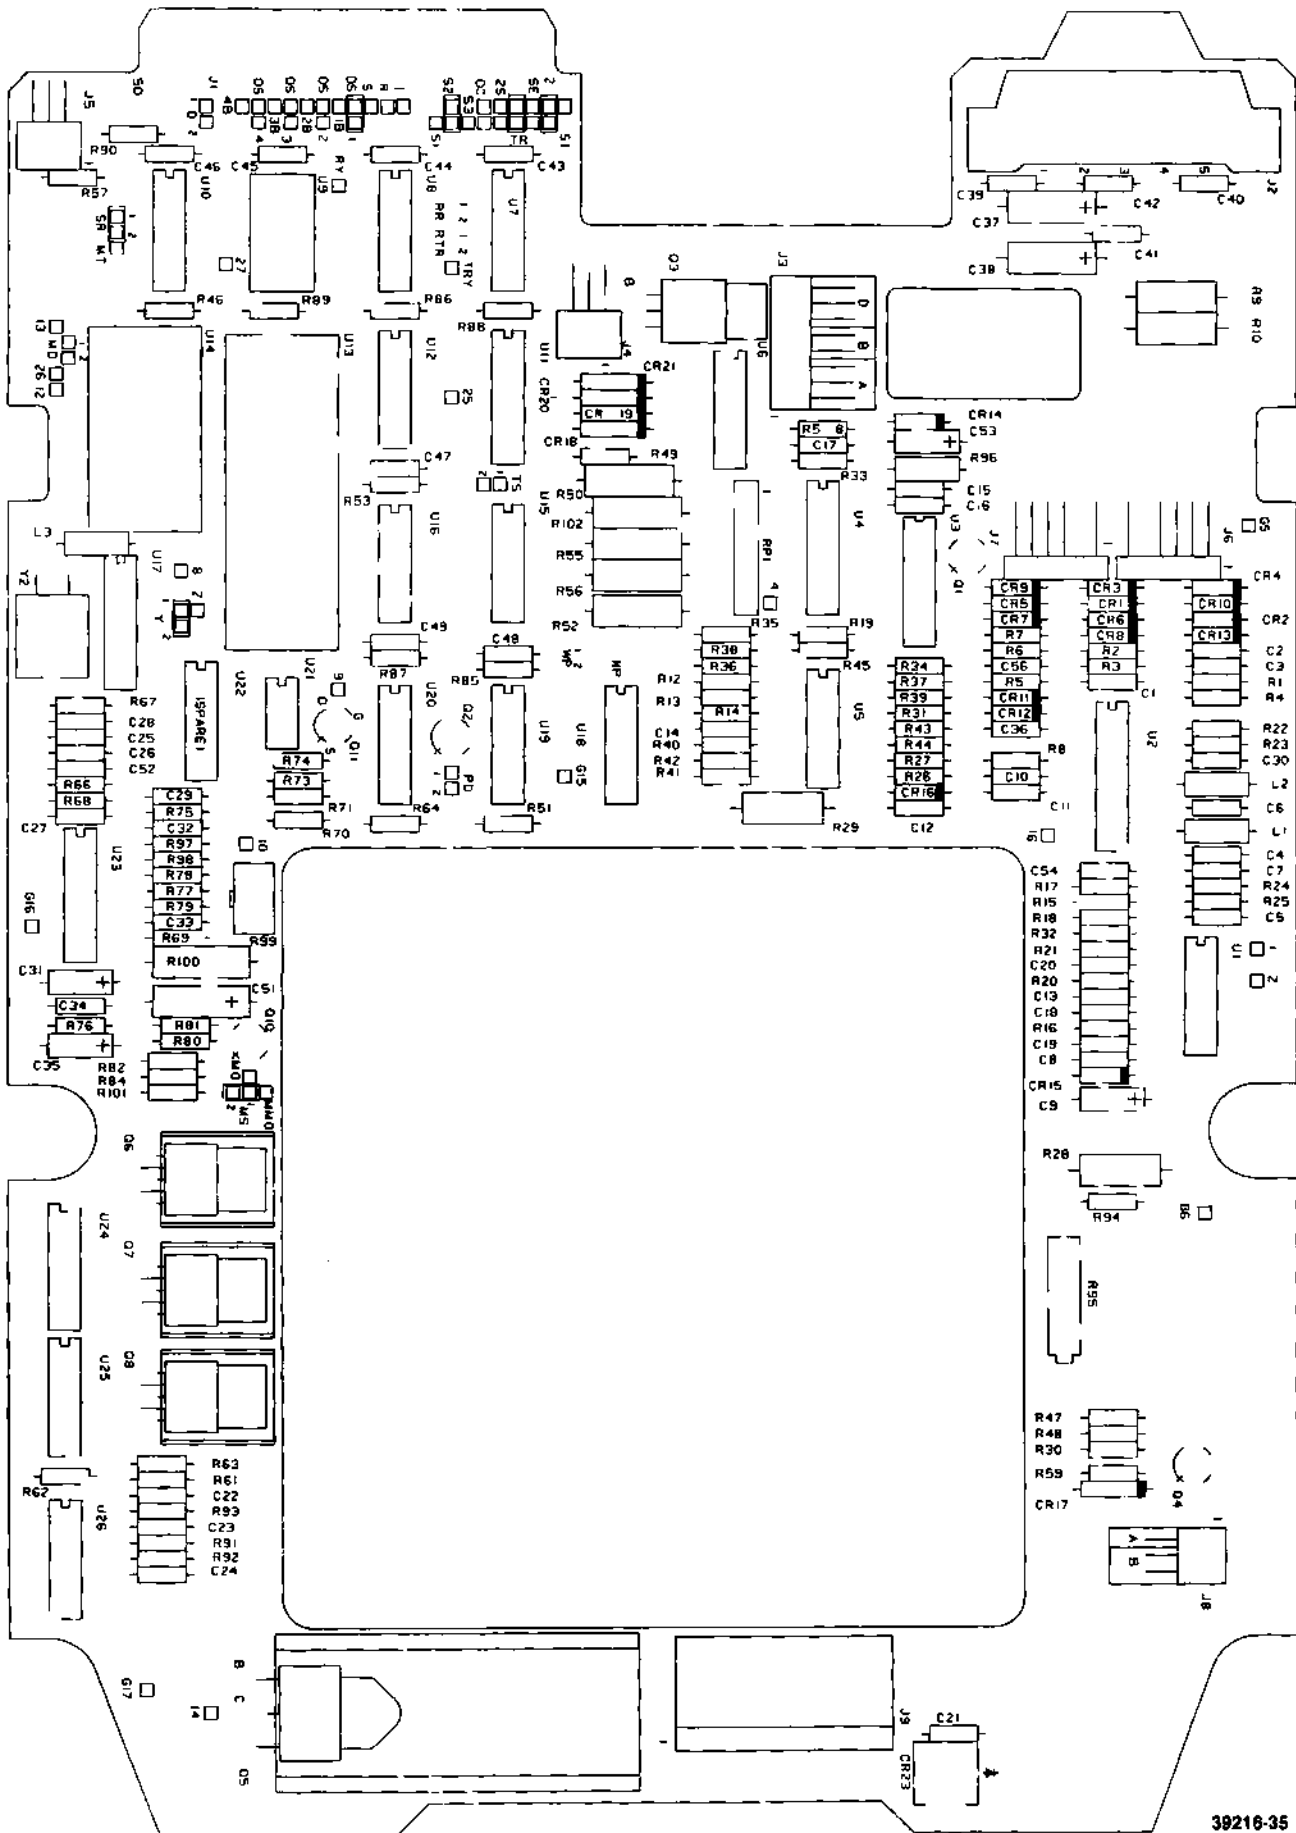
PCB COMPONENT LOCATIONS (P/N 25227 AND 25247)
